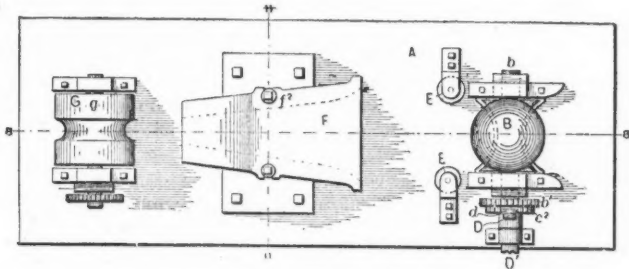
Plan View of Apparatus for Making Wrapped Steel
